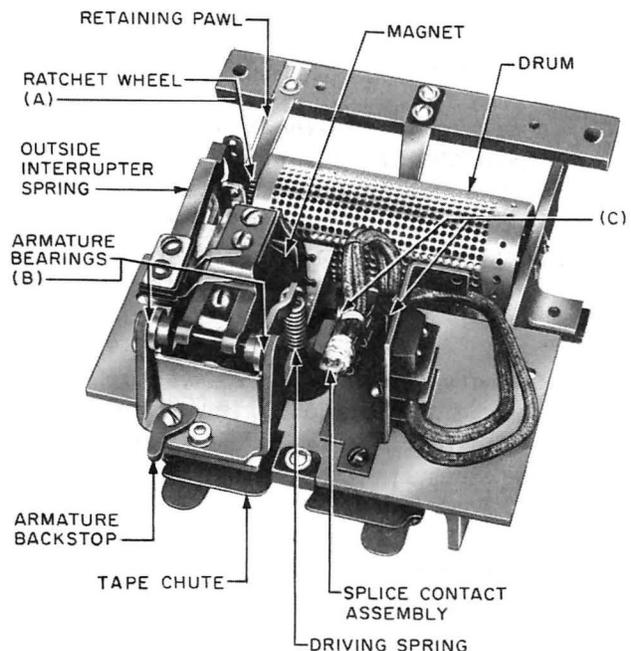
Drum Advance Mechanism and Splice Contact Assembly — D-176283 Perforator
